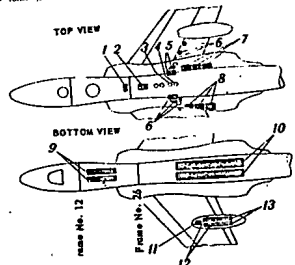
ARRANGEMENT OF ACCESS HATCHES FOR INSPECTING HYDRAULIC SYSTEM UNITS AND PIPE LINES
